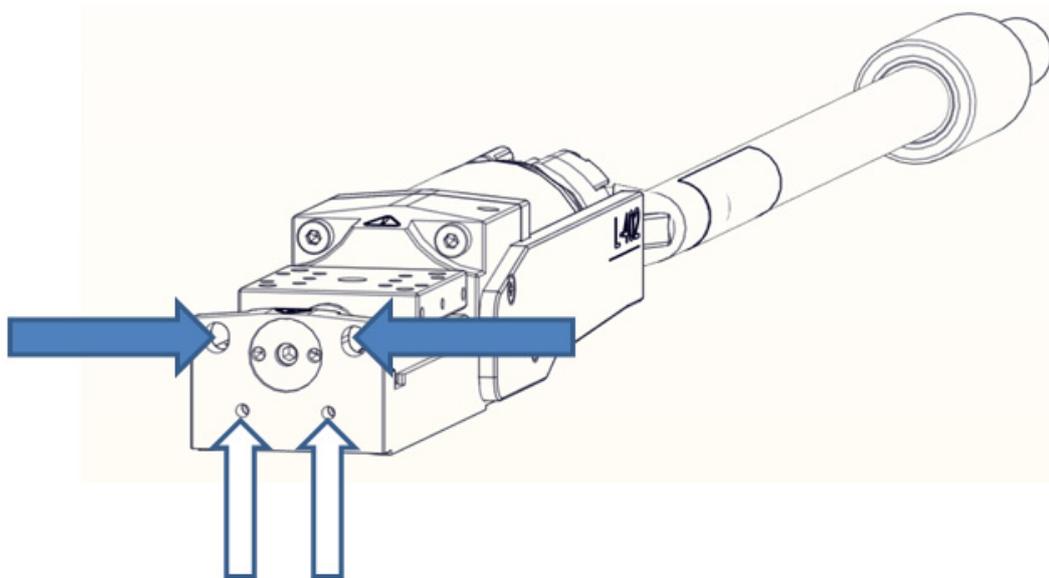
Position of the locating holes (bright/white arrows) and the mounting holes (dark/blue arrows) on the front
